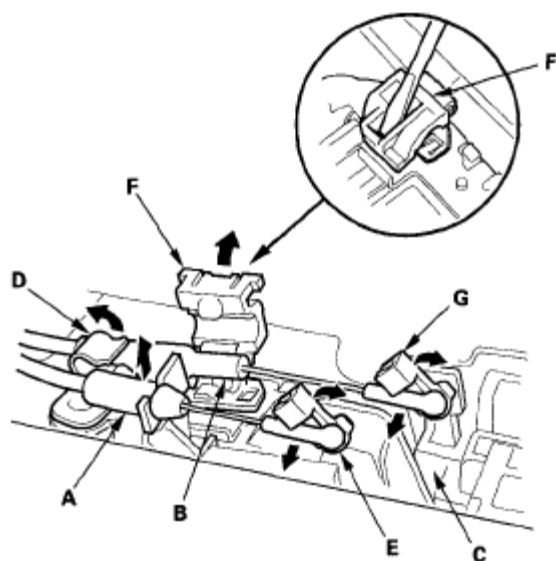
Disconnecting Inner Handle Cable And Latch Cable
